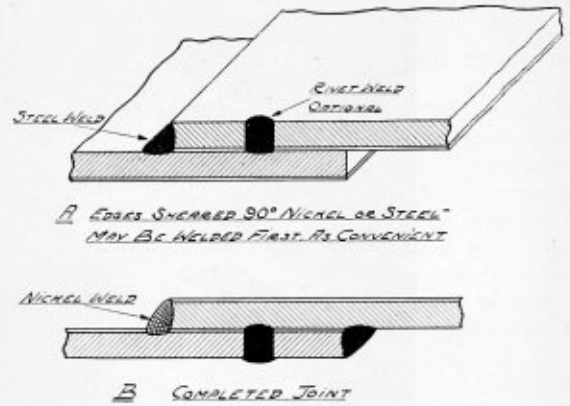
Lap-welded joint, metallic-arc welded
